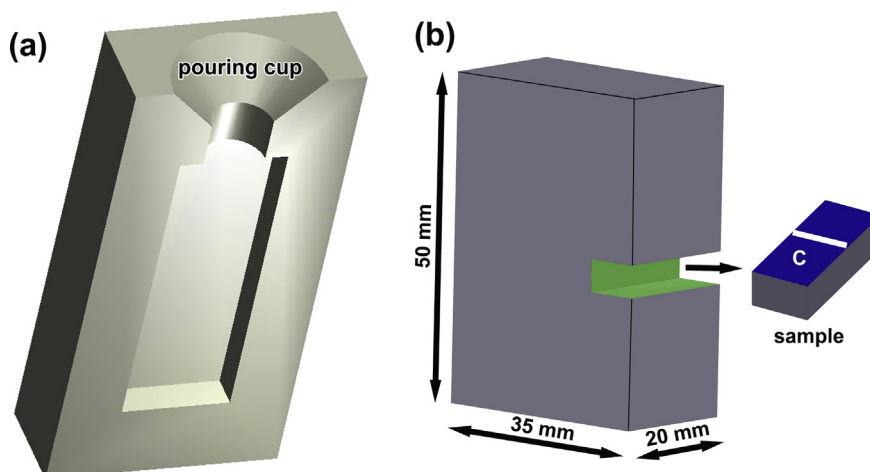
Graphite mold (a) and casting and the selected sample (b).
